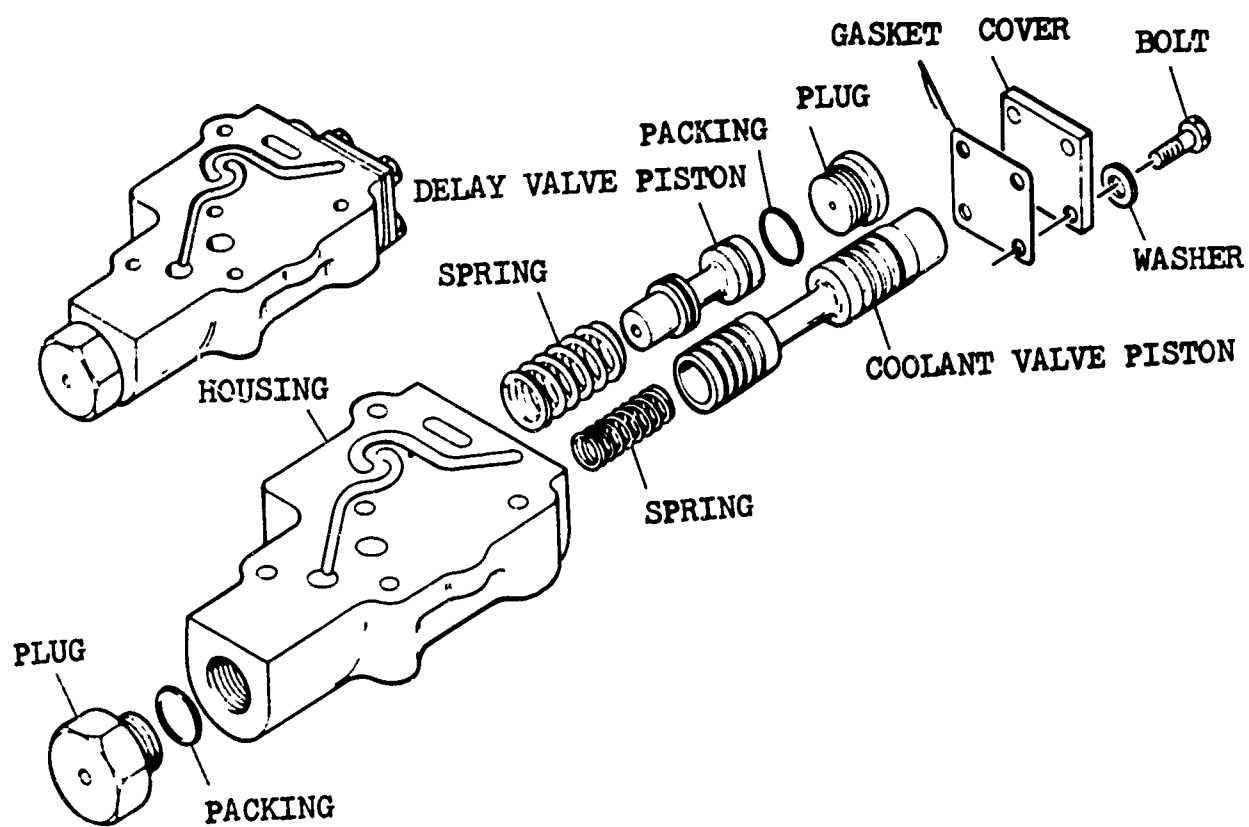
Brake Coolant and Time Delay Valve Assembly (exploded view)
